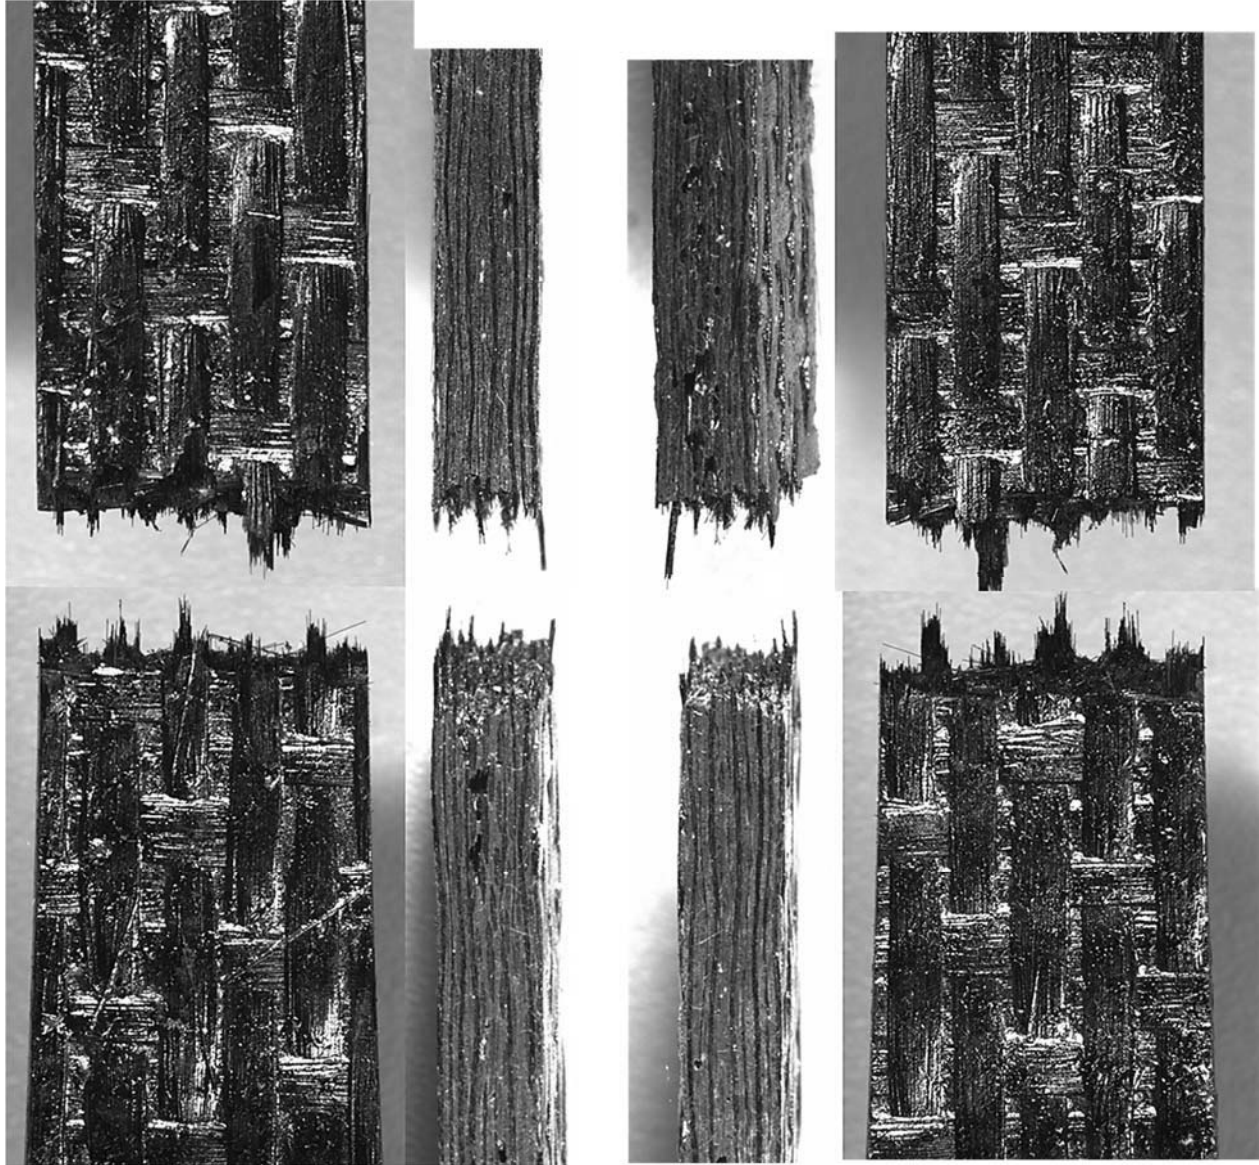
Top and bottom fracture surfaces of specimen 16-031, tested in fatigue at 1200°C in air. $\sigma_{\max} = 120$ MPa, $N_f > 200,000$
